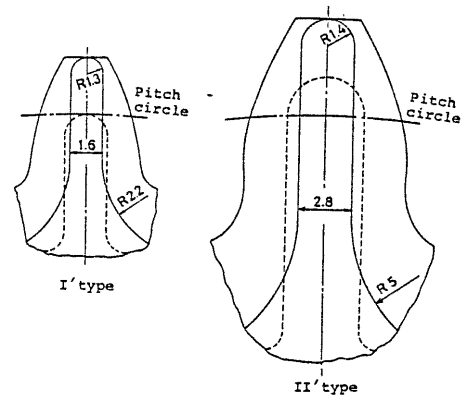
Dimension of stiffener at the tooth of improved SN-gear
